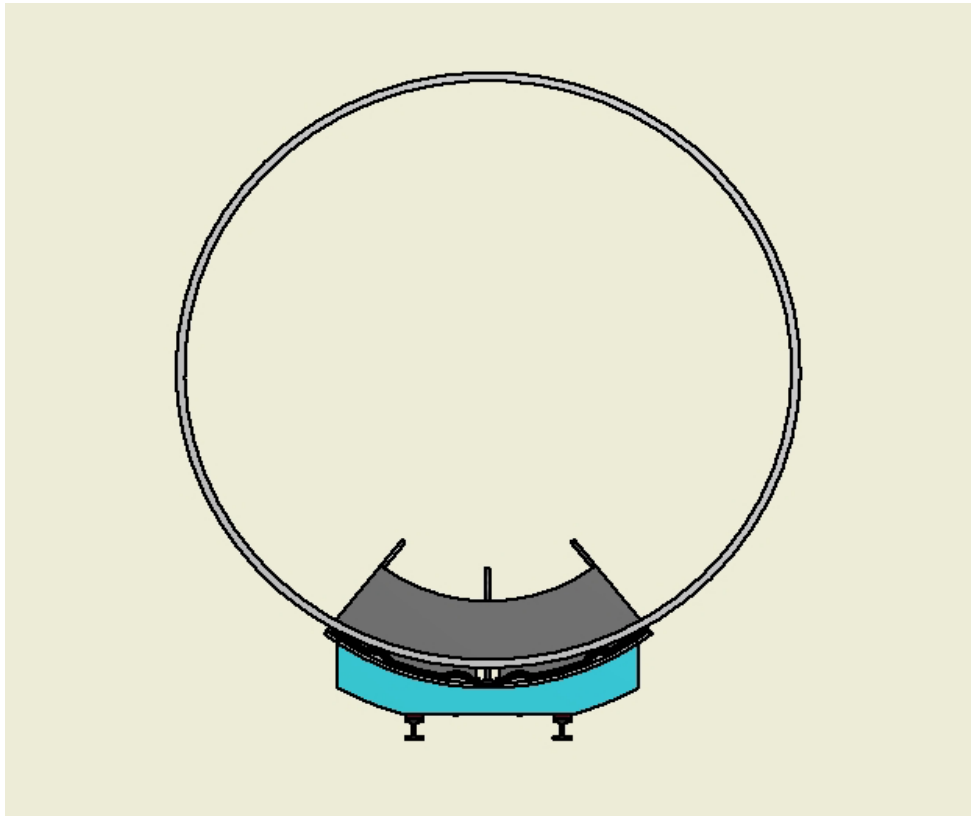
110 1/2" O.D. Cut-In Outlet on 86" O.D. Pipe Carrier.
